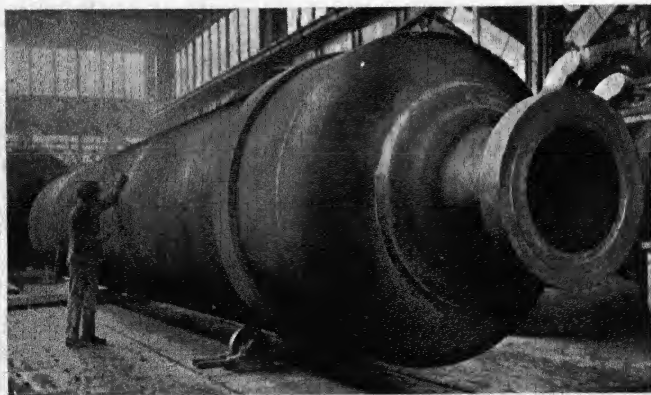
Welded vessel by Fr. Krupp.
